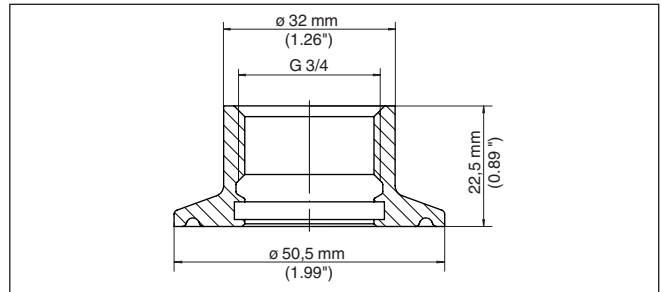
Dimensions of threaded adapter G $\frac{3}{4}$  (DIN 3852-X) on Clamp 1 $\frac{1}{2}$ " (DIN 32676, ISO 2852) PN 16
